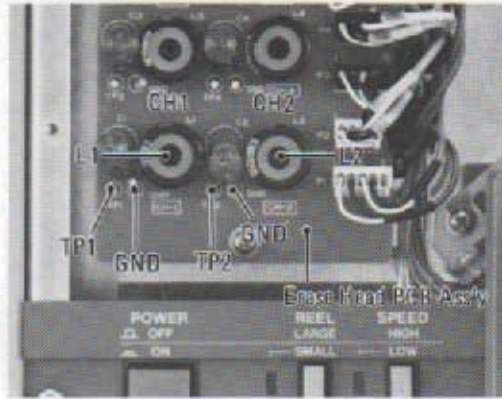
Erase Head PCB and Record/Reproduce Amplifier Adjustment Points
